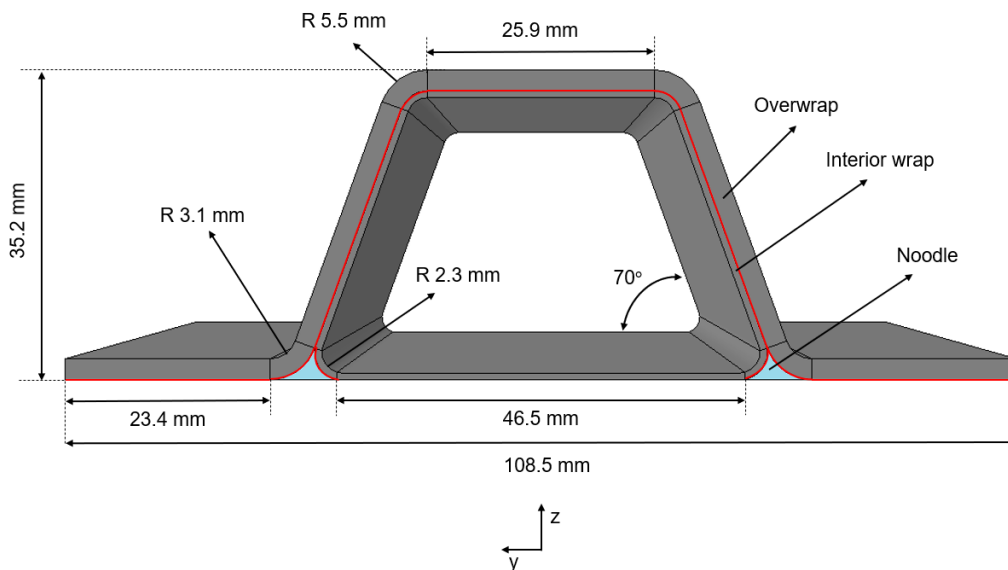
Cross-sectional view of the stringer showing the different parts of the stringer and the relevant dimensions.
